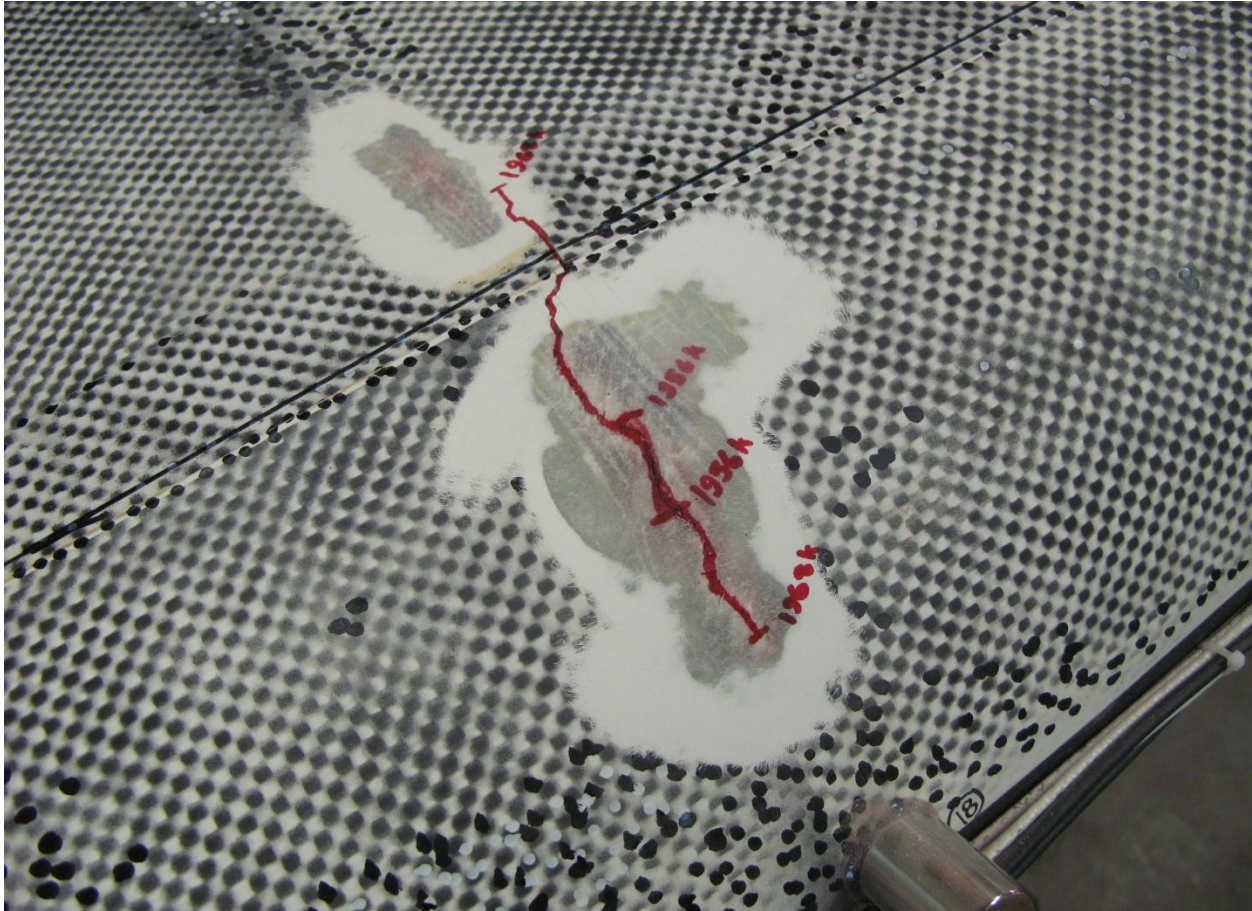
Structural Failure (HP Side at the 5-m Station)
